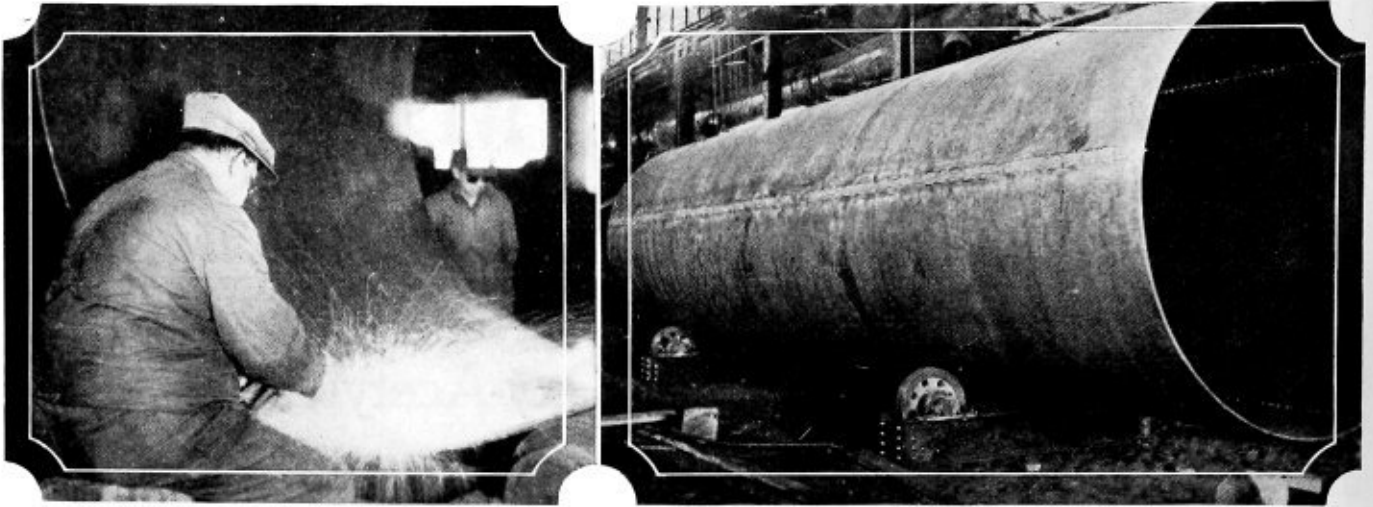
(Left) Welding a Longitudinal Seam of Rotary Kiln Section. (Right) End Section of Kiln with Welds Complete.
